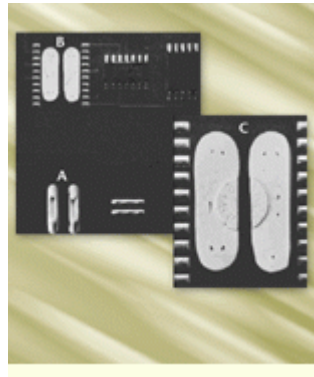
Adhesive before (a) and after (b) component placement, with a close-up view of the adhesive after placement (c).
